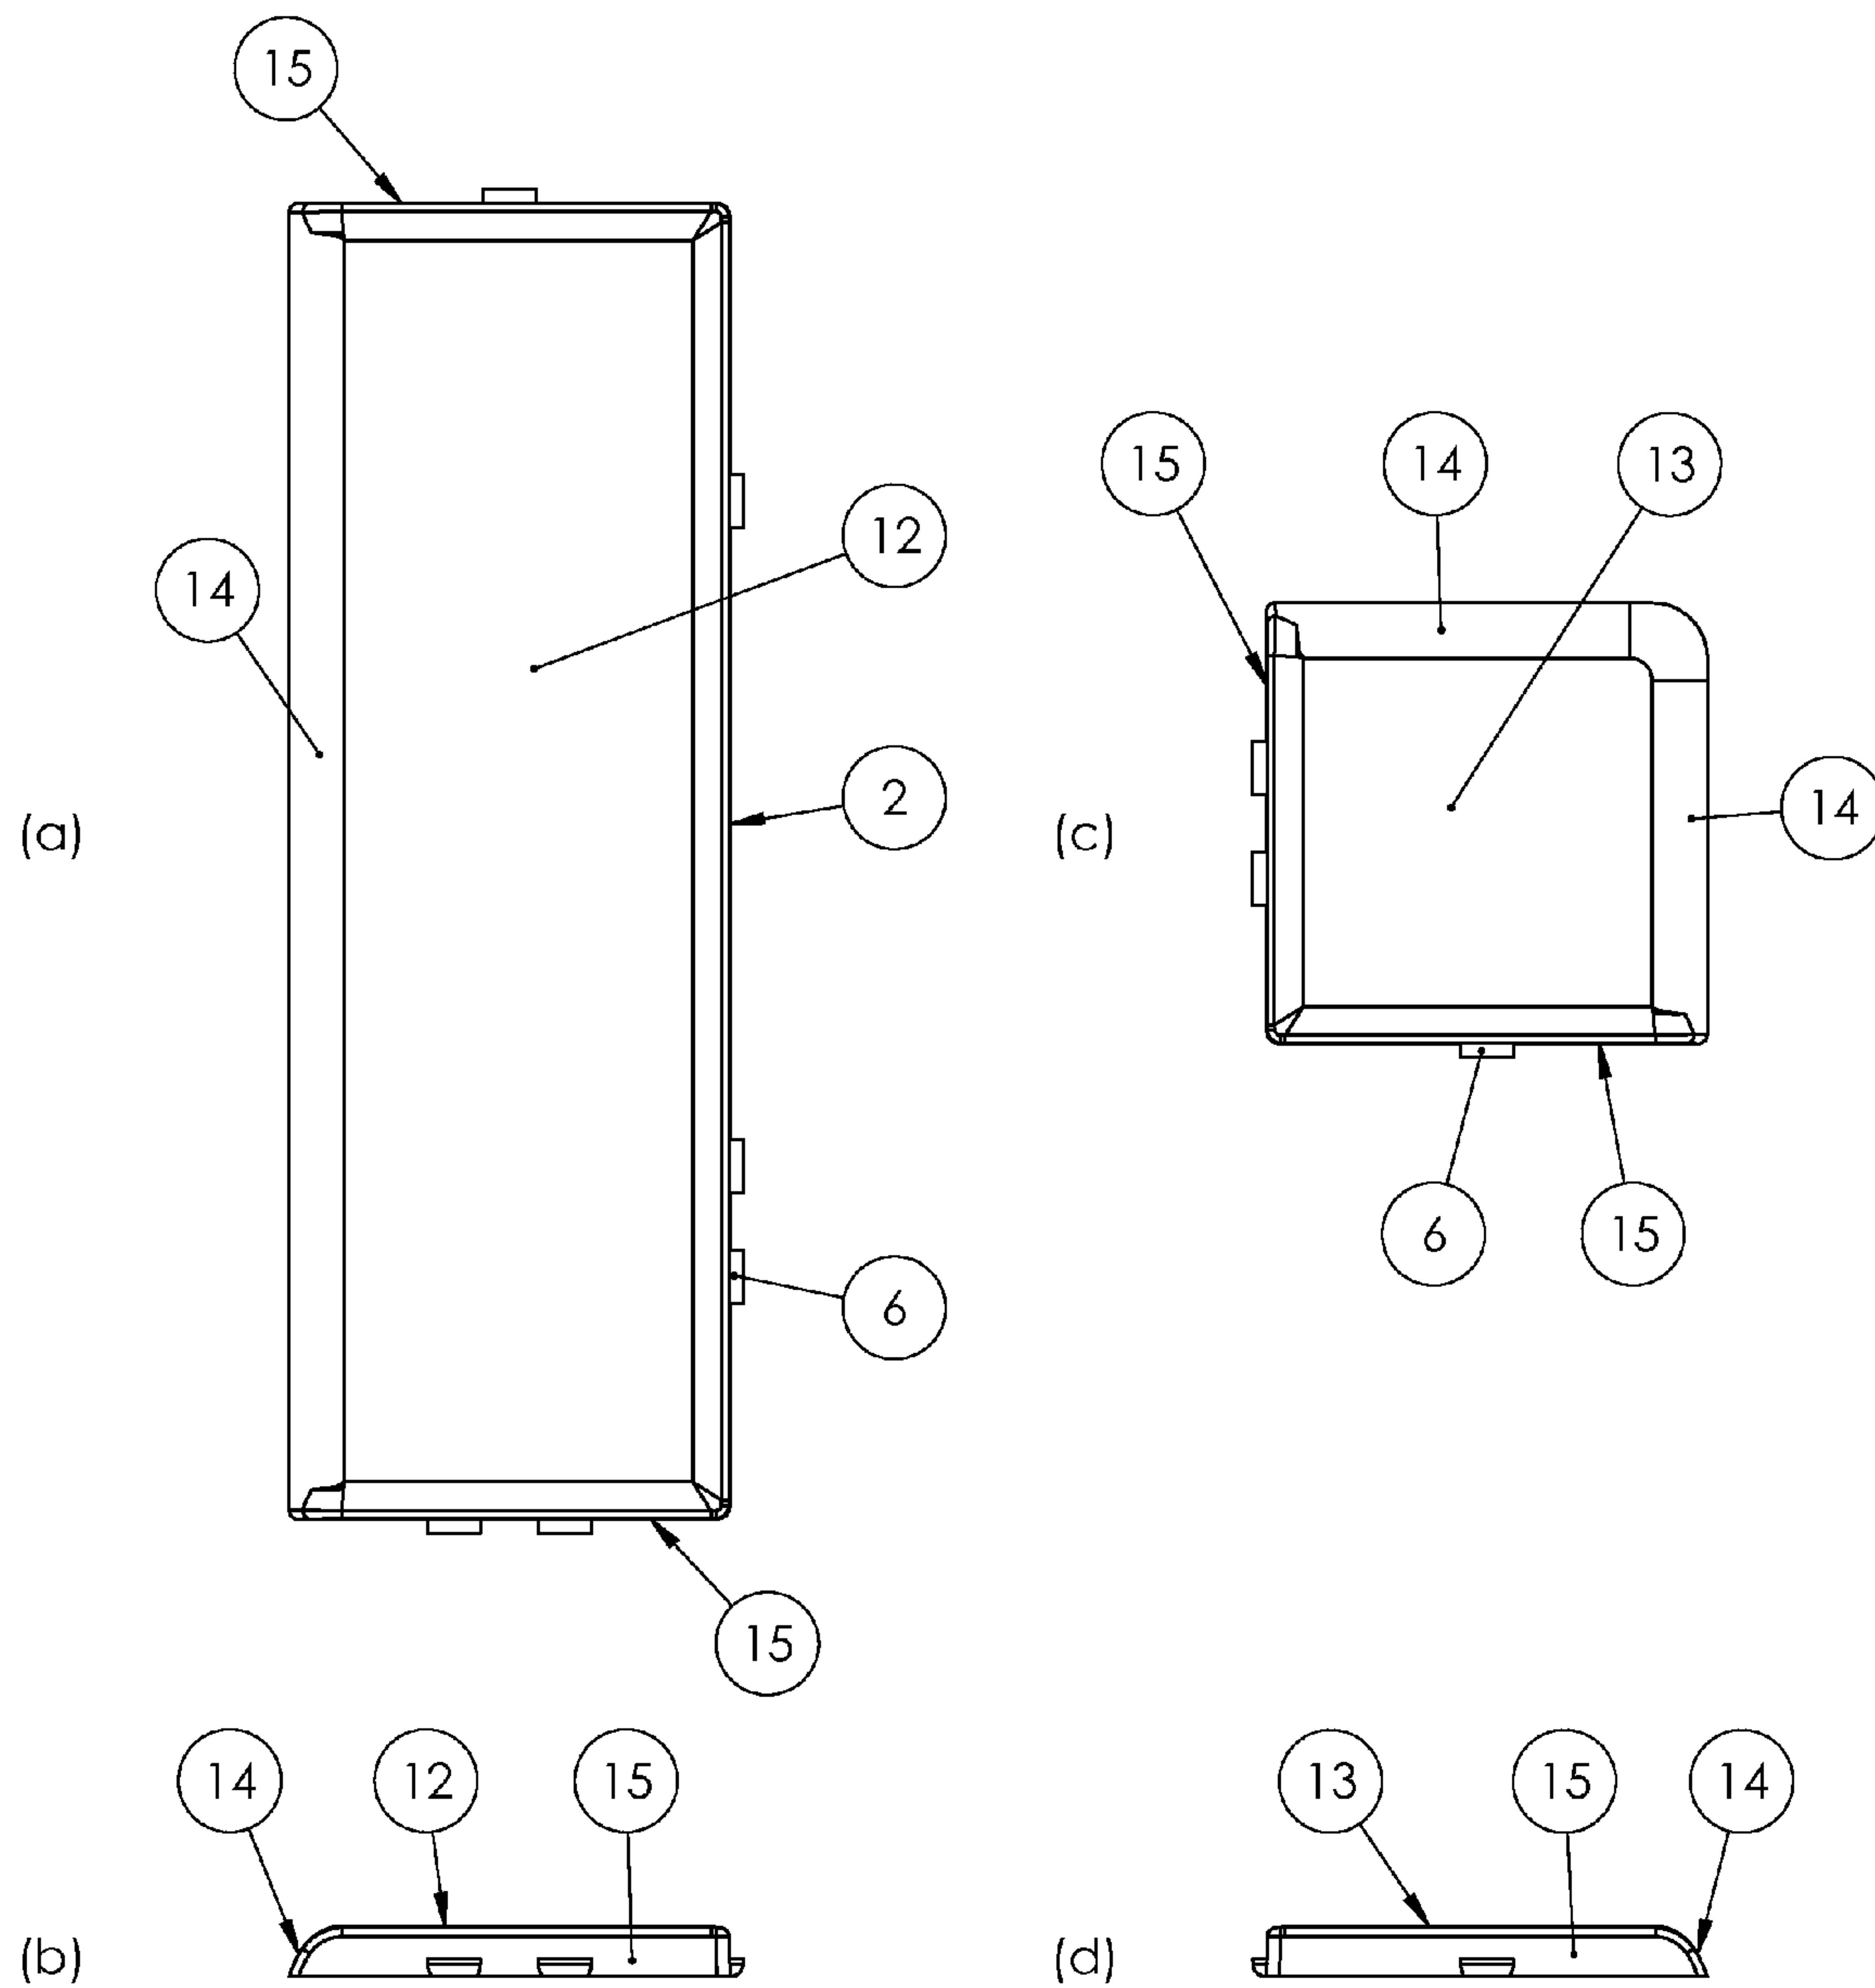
(a) Front View and, (b) Side View of Border Tile, (c) Front View and, (d) Side View of Corner Tile
